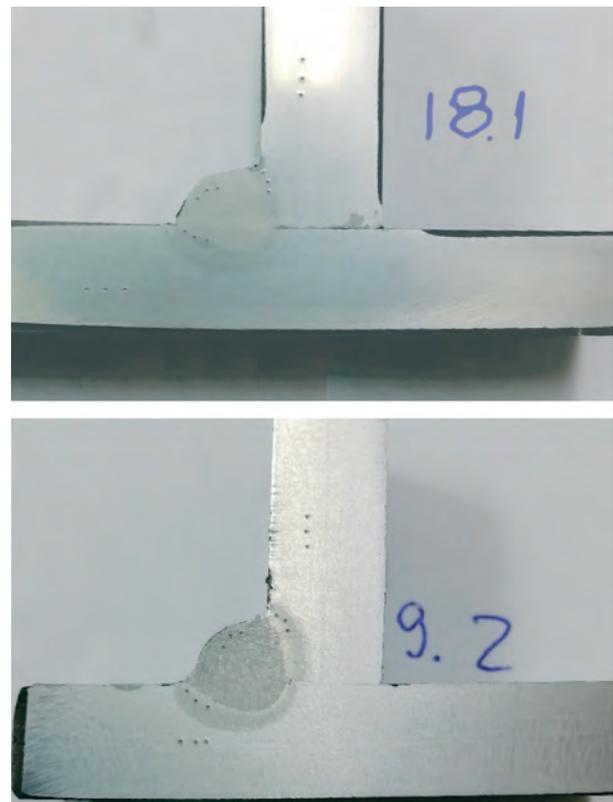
The aspects of proper welded macroscopic samples.
